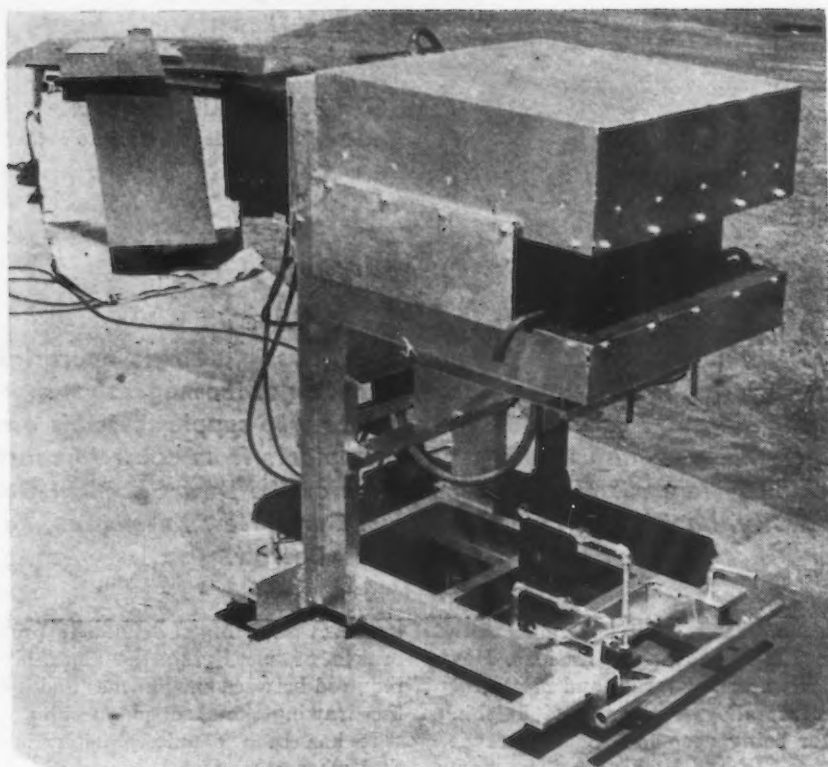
Contact plate type electric preheater for magnesium blanks developed by Dow. This unit is a portable type using air pressure to bring contact plates together.
